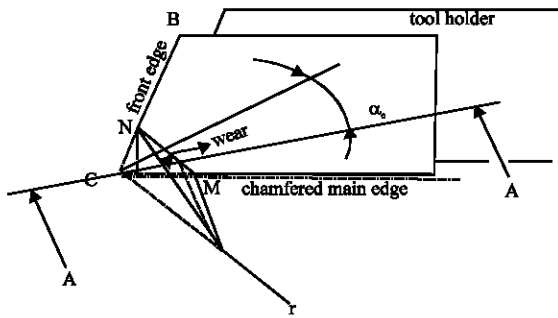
Condition of tool tip wears with chamfered main cutting edge tool
